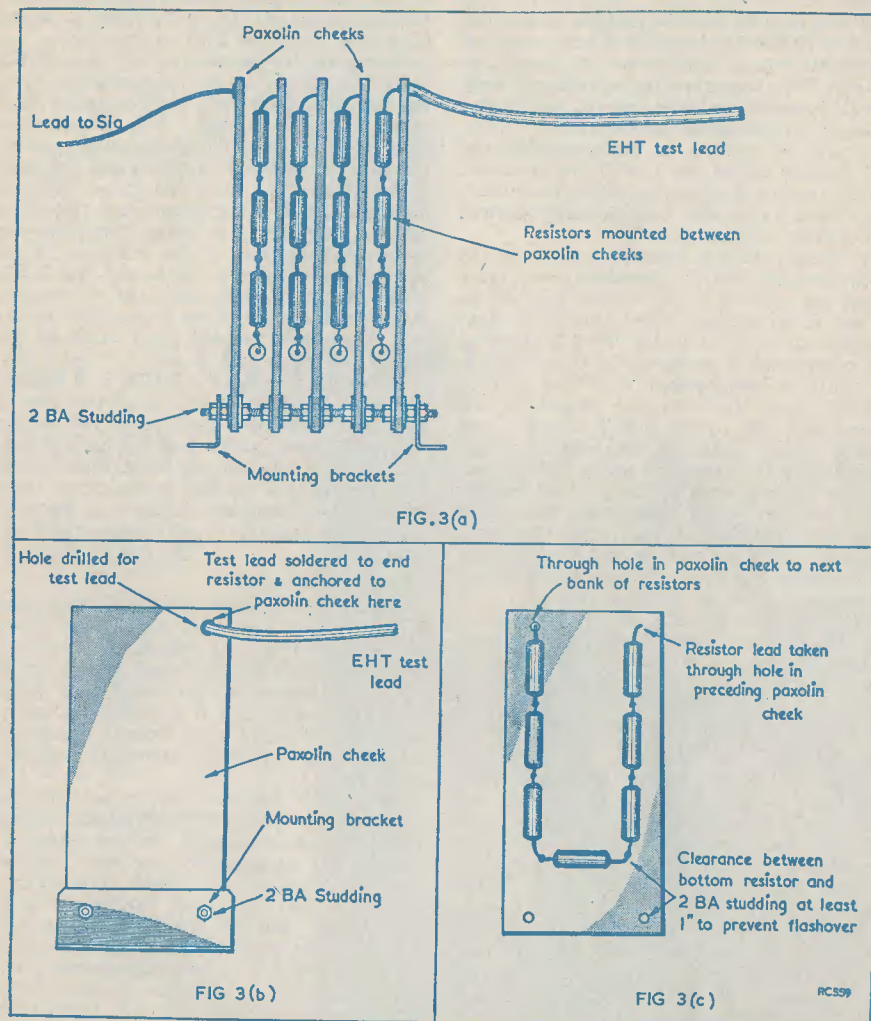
(a) Side view, showing a suggested method of mounting the resistors which make up R1. The number of paxolin cheeks used may be selected by the constructor to suit the resistors obtained by him.
